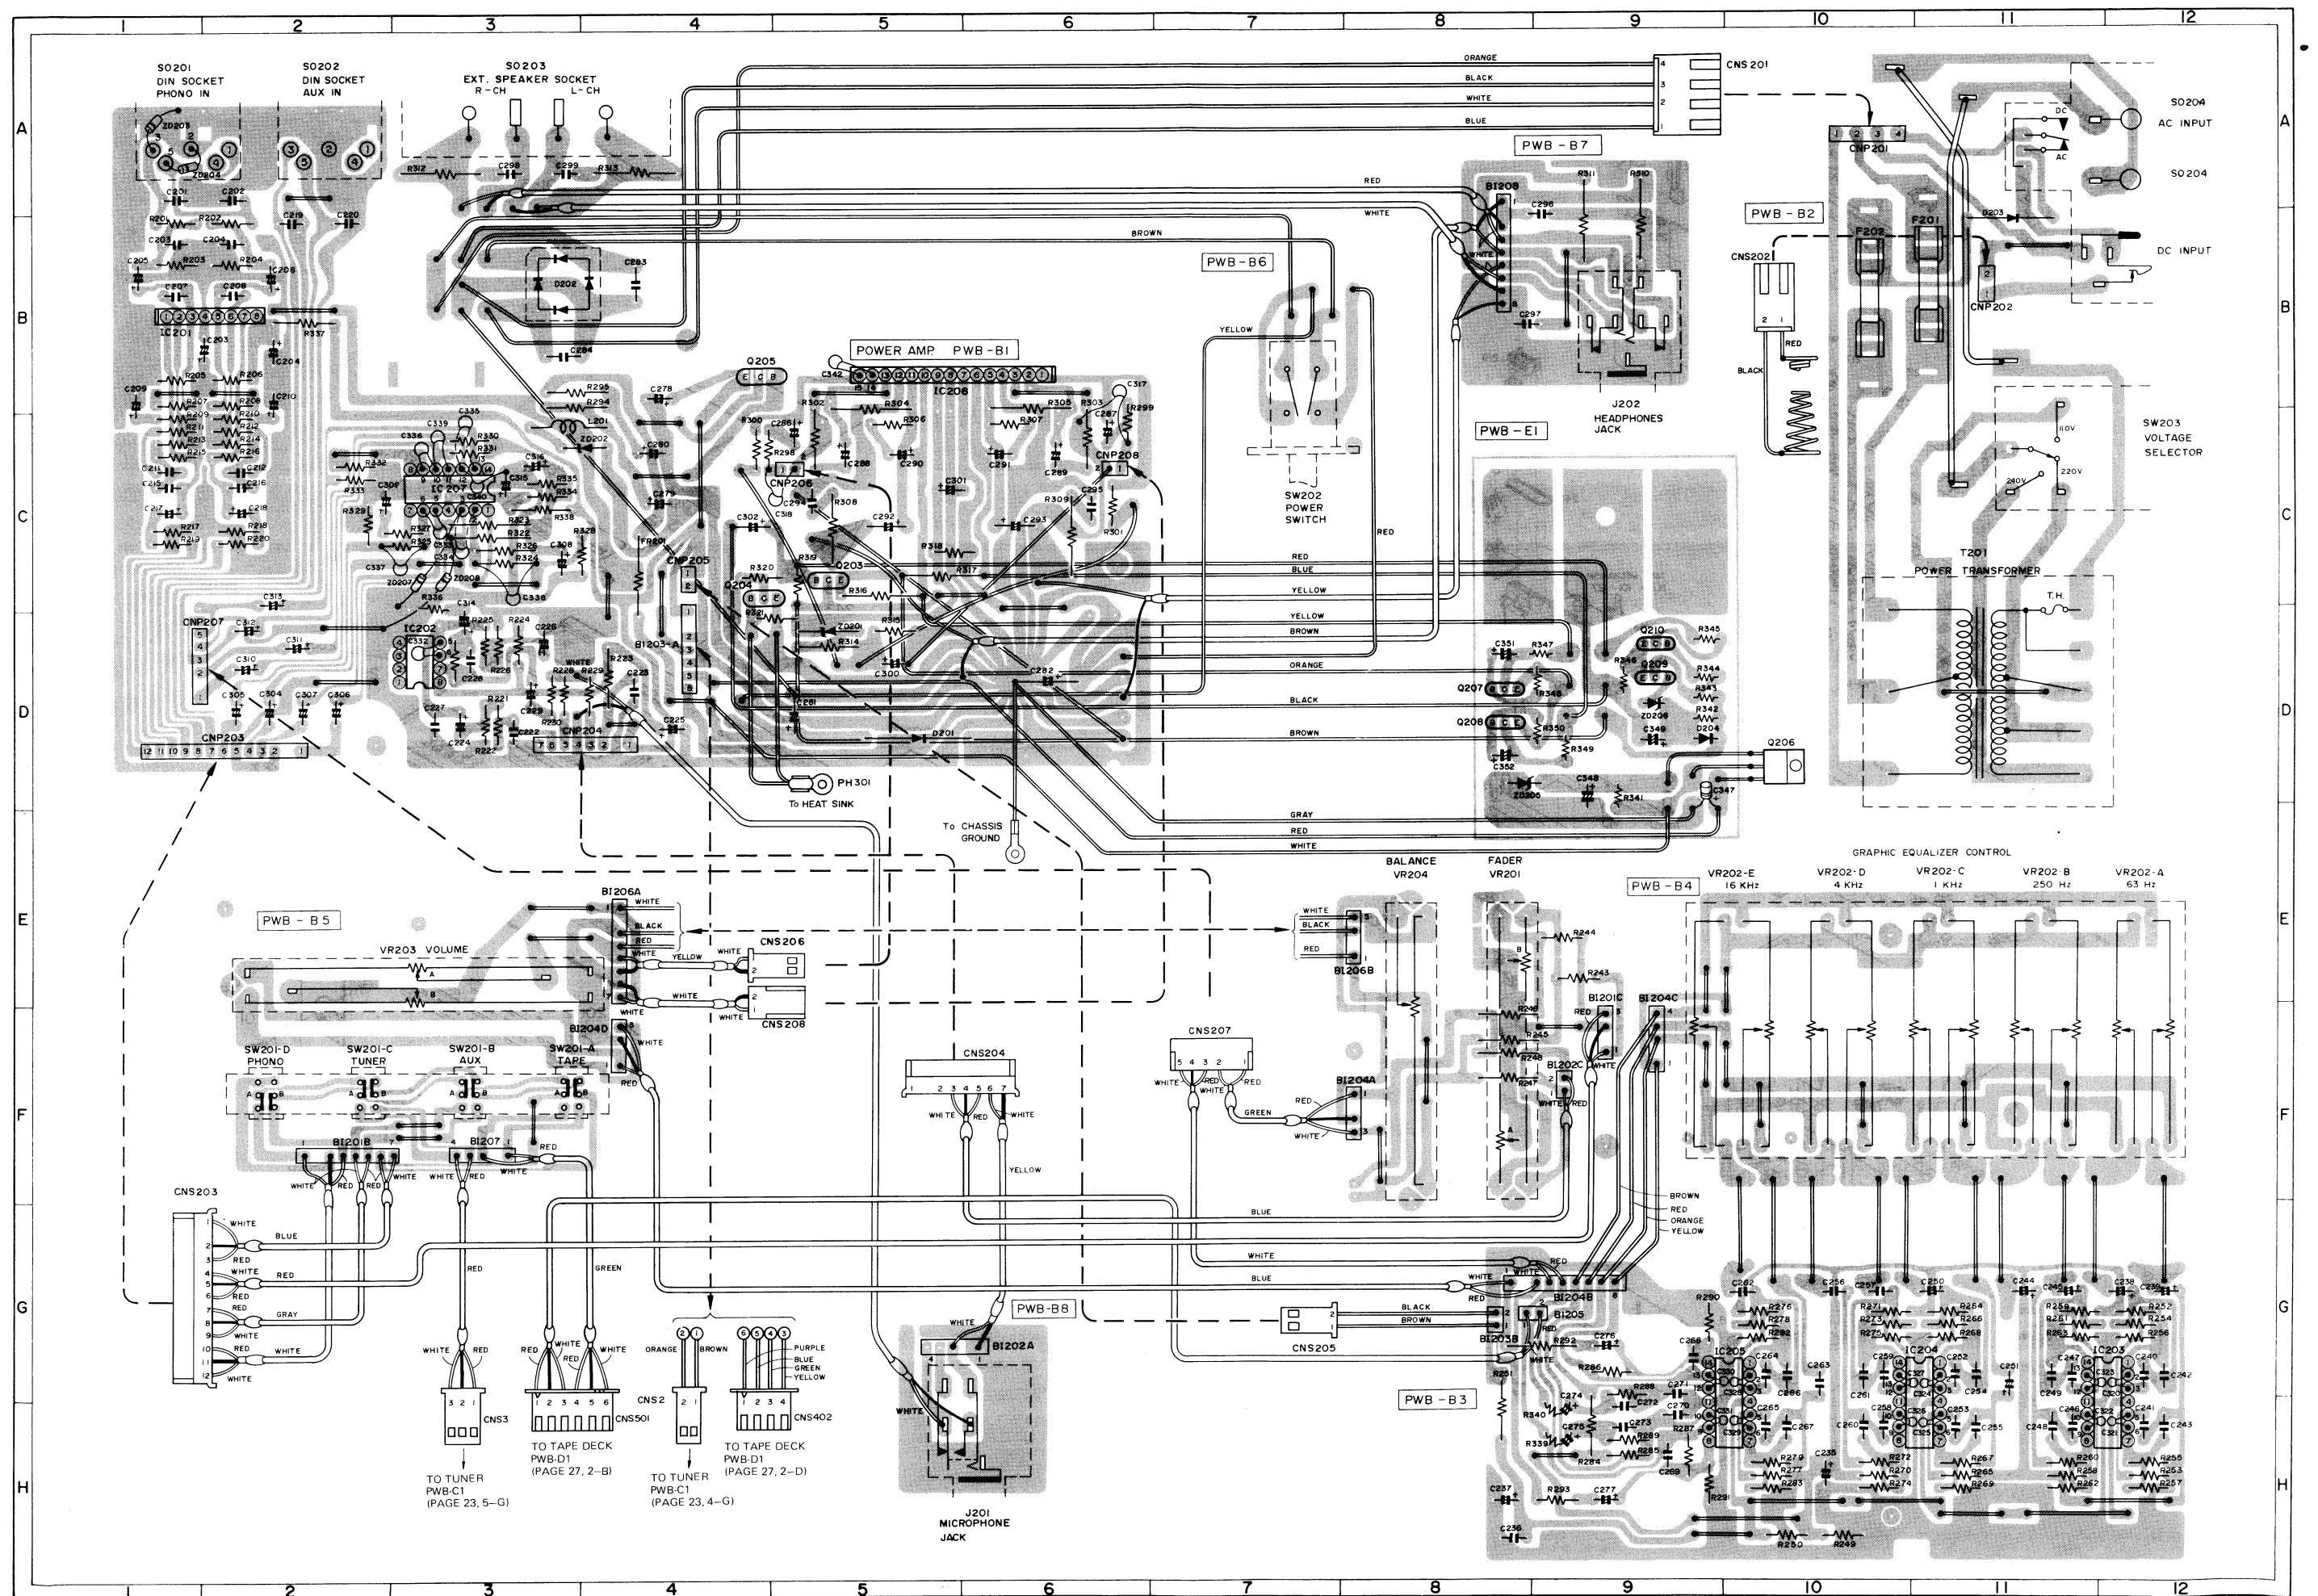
WIRING SIDE OF P.W. BOARD (3/3)
